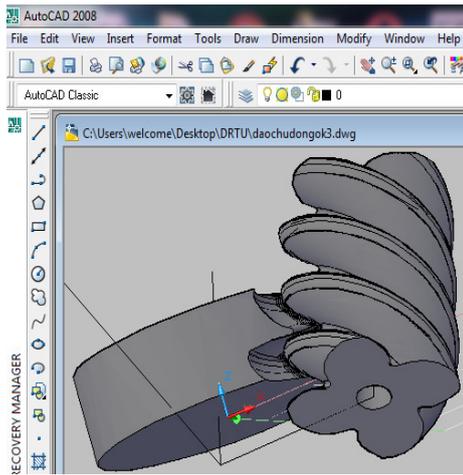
Creating the disk tool for helical surfaces in AutoCAD
